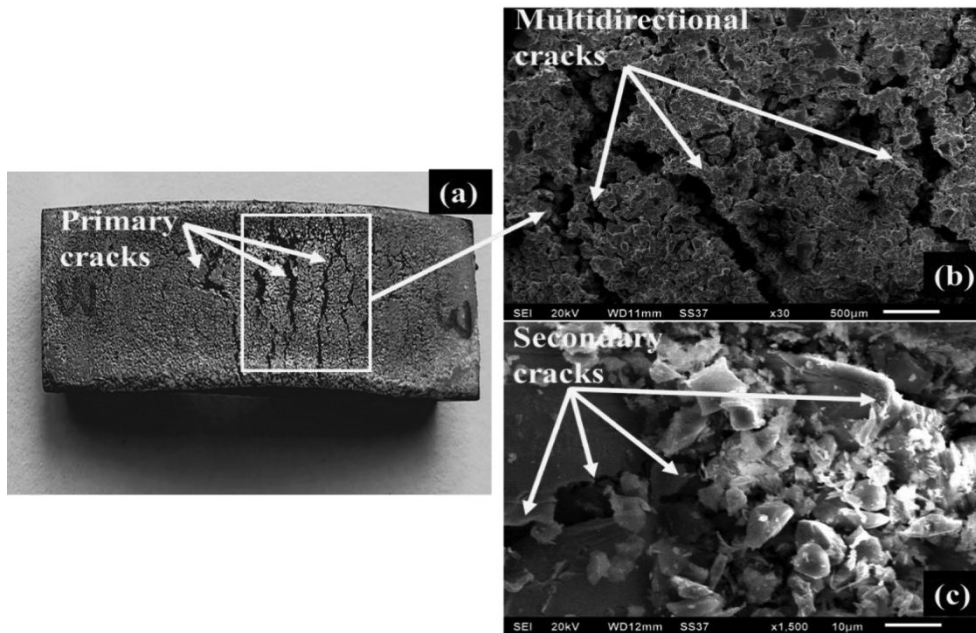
Fractured EWAC-10Cr₃C₂ clad specimen after 3-point bend test (a) Photograph of the top surface; SEM micrograph showing (b) primary cracks (c) secondary cracks
